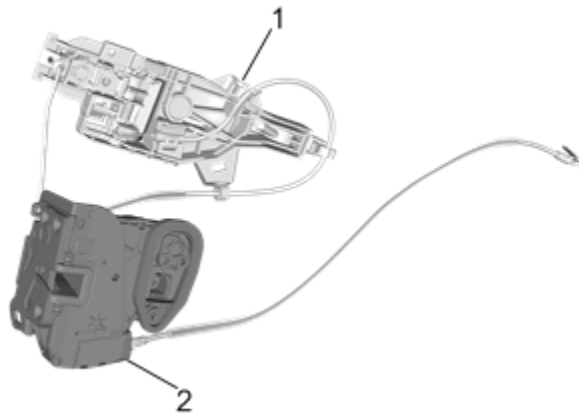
Rear Side Door Outside Handle Bracket And Rear Side Door Latch
